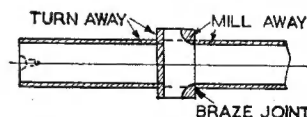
How to fit the axle collars. Part shown shaded machined away after brazing
